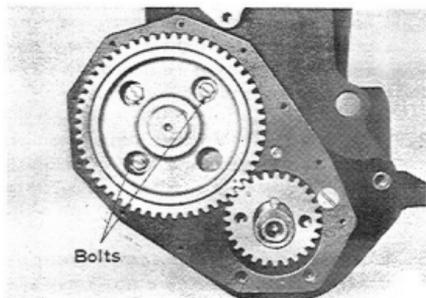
Removing Camshaft V4346 Thrust Plate Bolts
